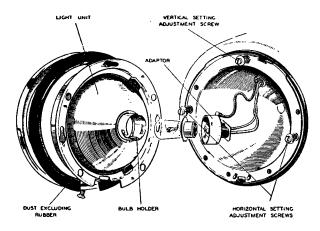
Showing the headlamp adjustment screws and bulb location.
